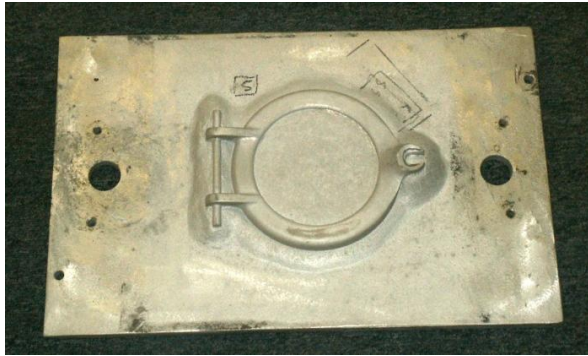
Cast aluminum match plate for porthole lens frame. Note the needed contours on the surface to release properly. The round core print for the hinge pin and the S inside the square is where the sprue will be placed during production.
